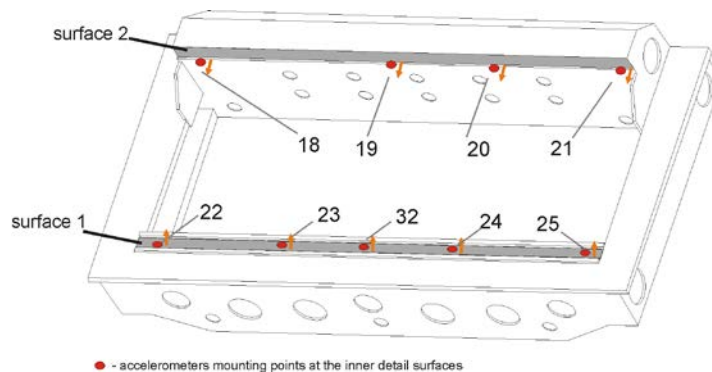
Schematic of the workpiece with the numbers of accelerometers and marked fixing points
